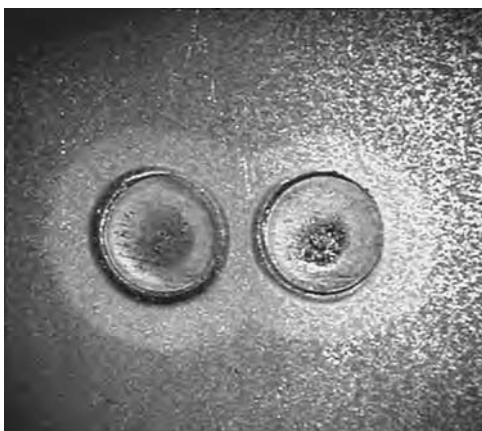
Welds with insufficient spacing. Source: Ref 1
